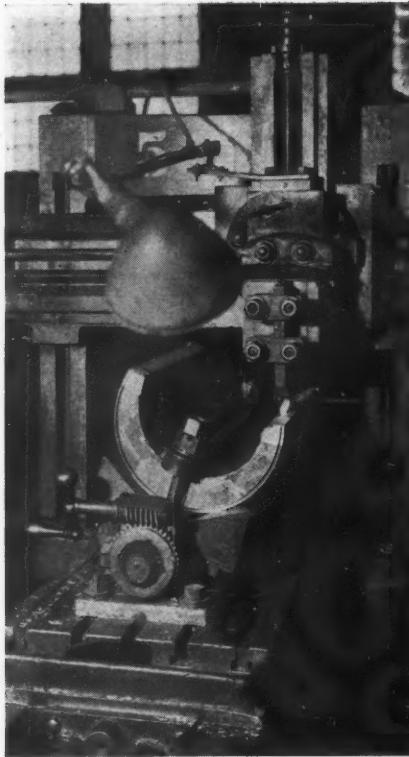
Planing toe-fits in brass driving box liners, using a Cincinnati shaper equipped with a Spicer fixture.
